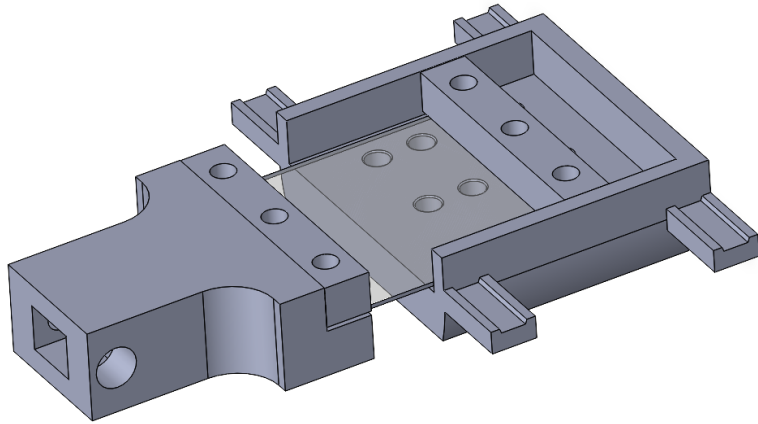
Tensile tester setup. The silicone is clamped in both pieces, which can be attached to the test mount and the hydrostat carrier.
